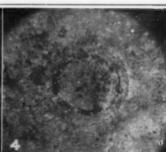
Corrosion at heattreated spot weld in duralumin sheet at the end of 60 days in salt-water spray. Magnified
